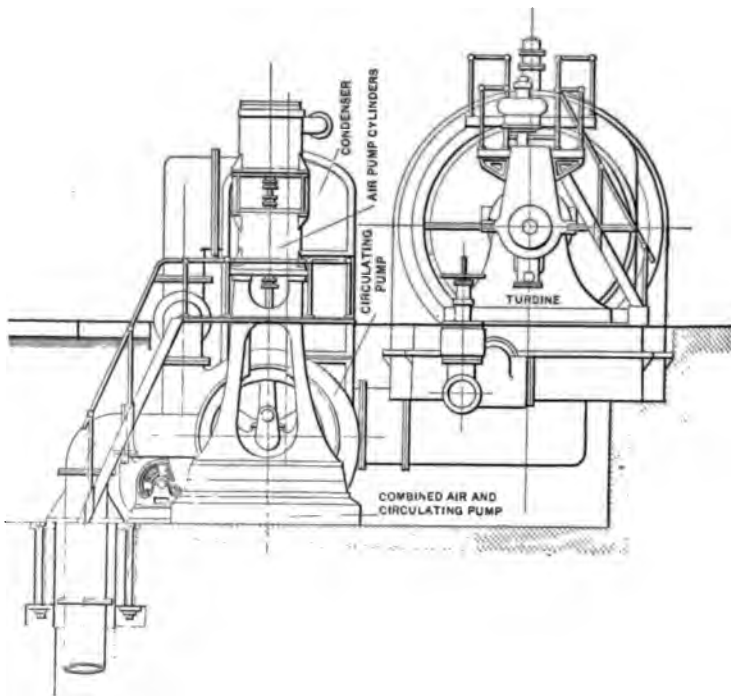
End View of Turbine and Condenser Shown on Opposite Page.
